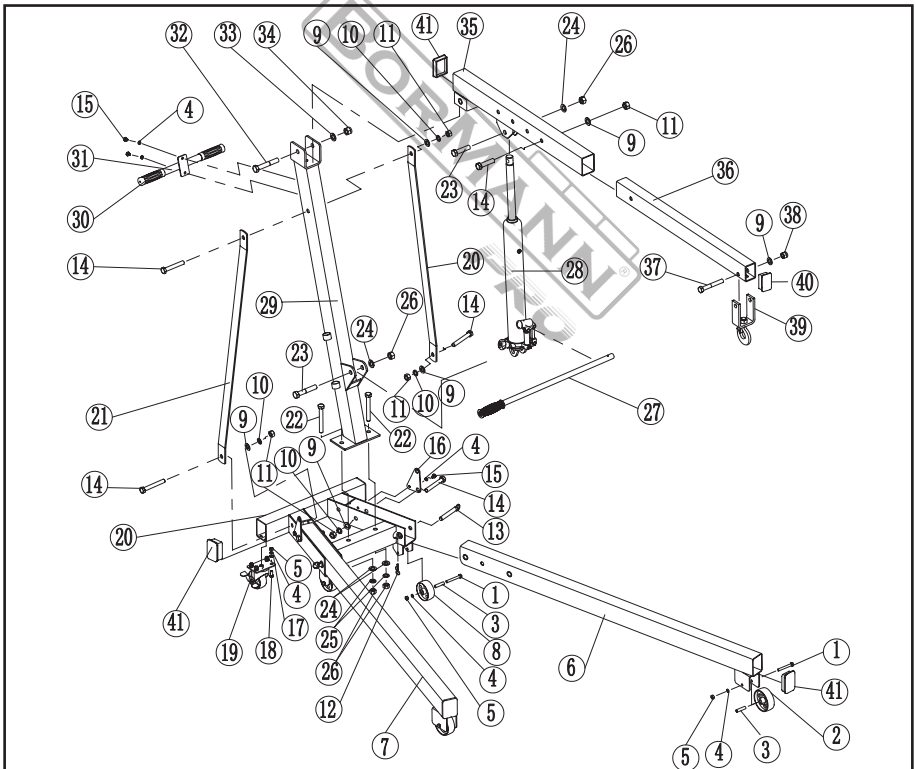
Hydraulic Engine Crane Assembly Diagram
